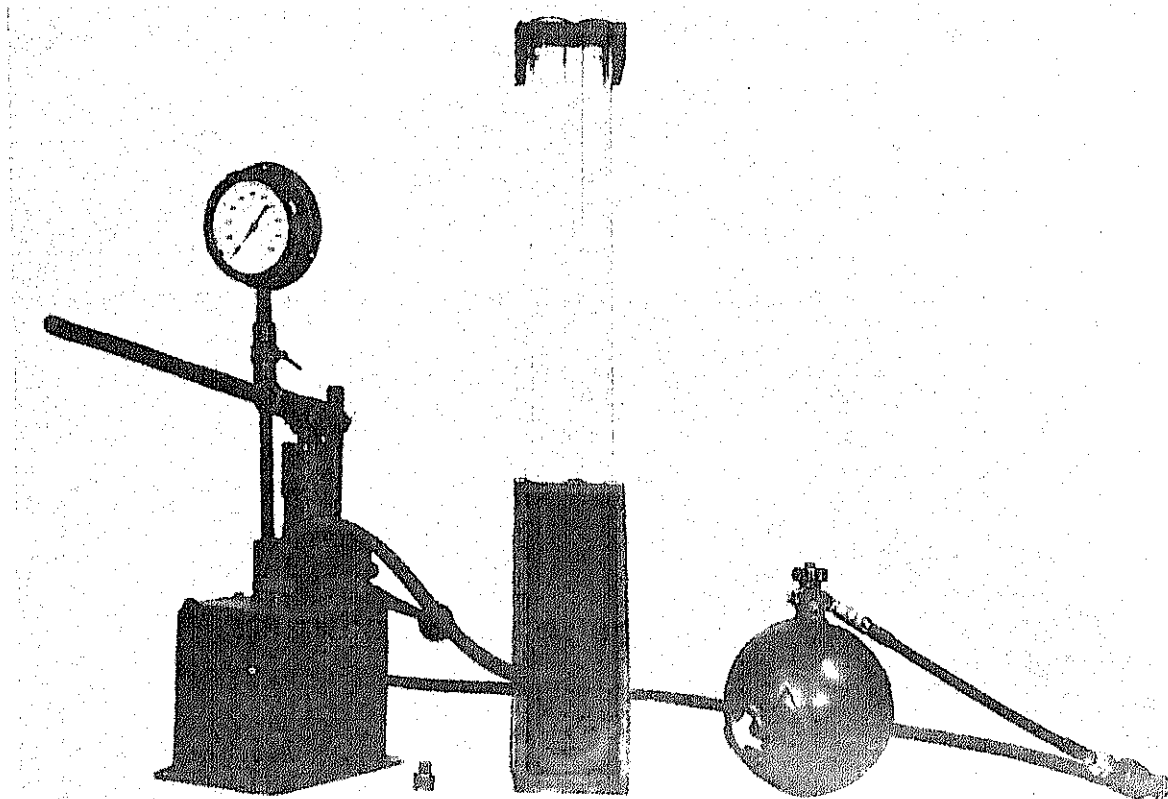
High pressure sphere assembly (with pneumatic hose assembly) attached to test set for hydrostatic test.
